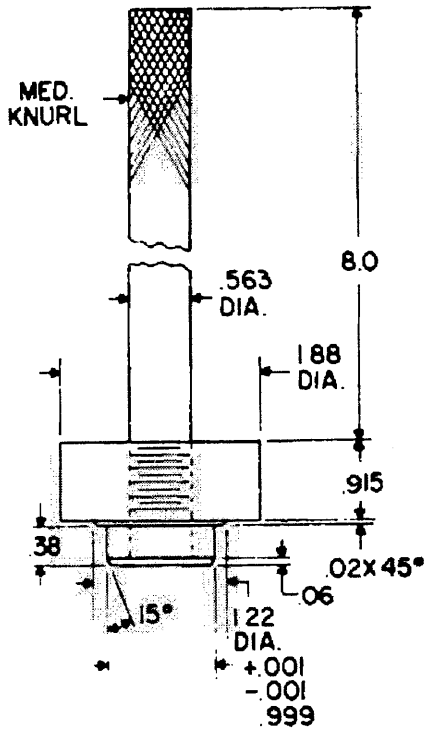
Drawing of special tool which may be used to install bushing (34—Fig. E2-33) in gearcase.
